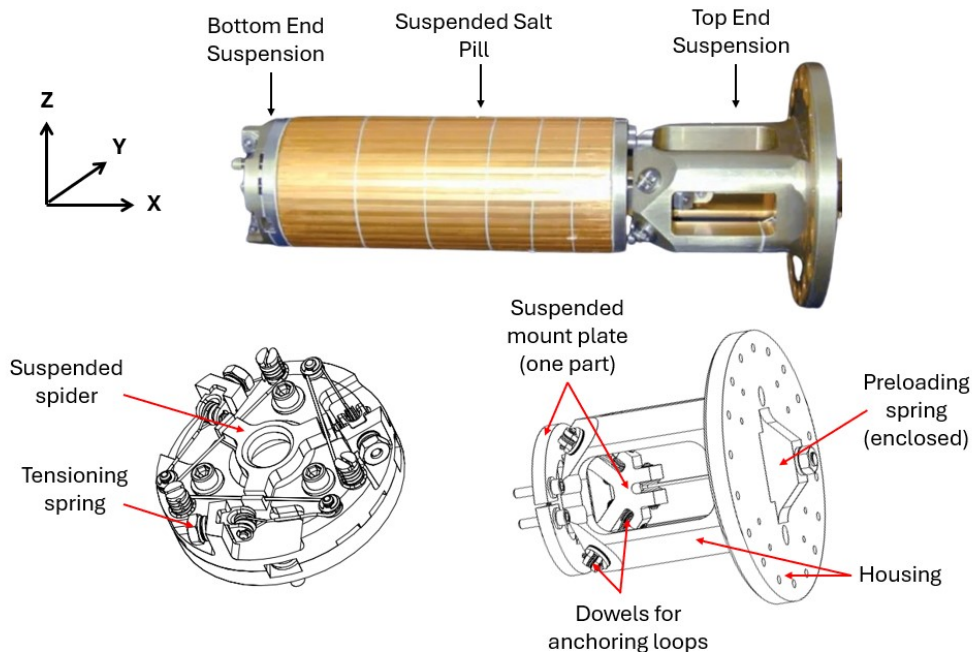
Top: Suspended salt pill. Bottom: detailed view of bottom and top end suspension. Adapted from: [46],[53].
